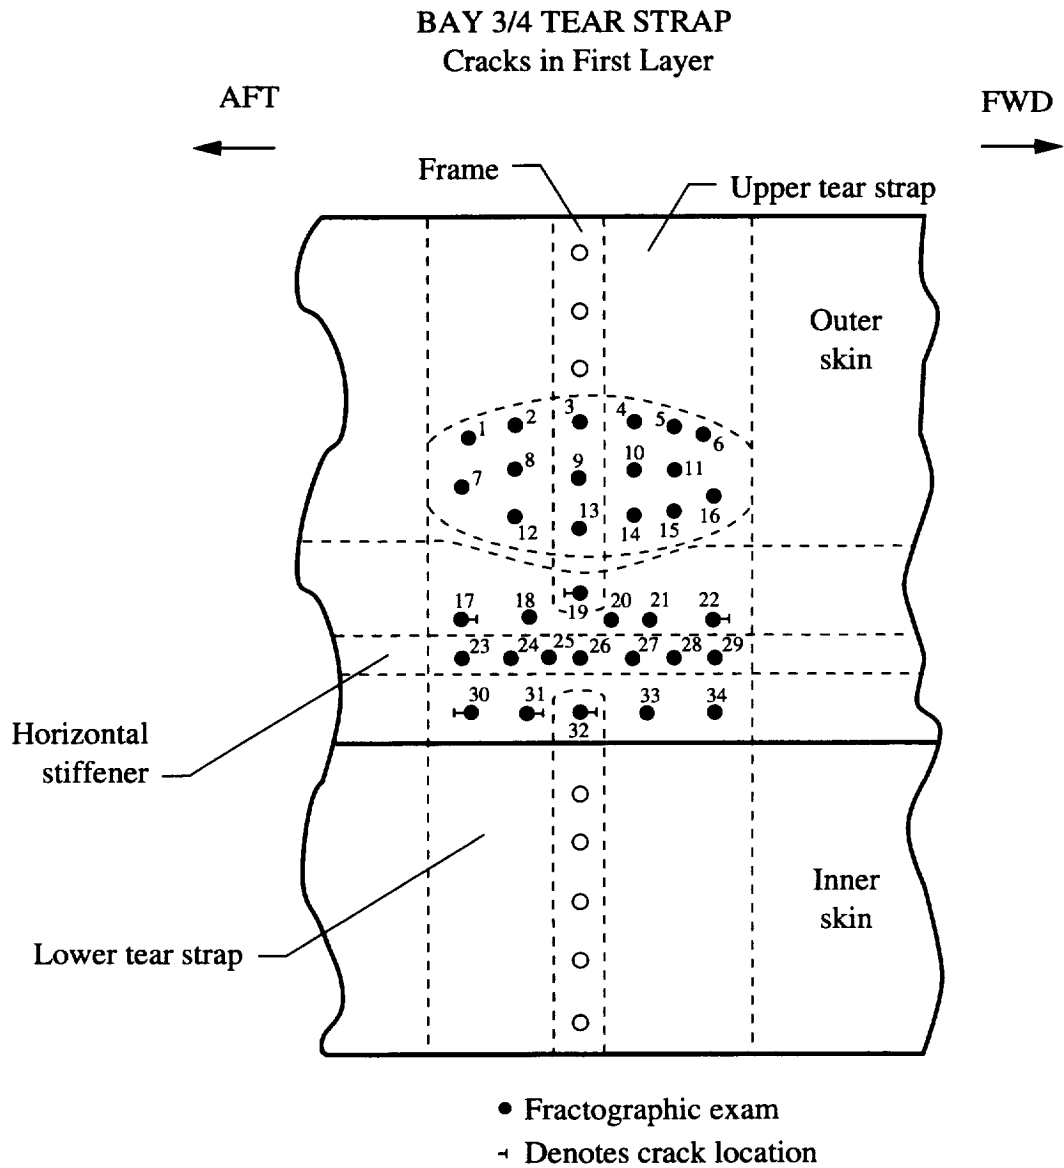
The schematic shows the location of fatigue cracks found in the first layer (outer skin) of the bay 3/4 tear strap by destructive examination.
